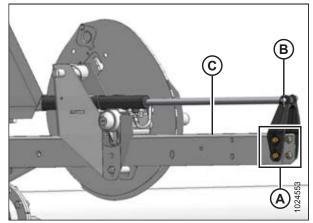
Right Reel Arm Cylinder in Forward Position
